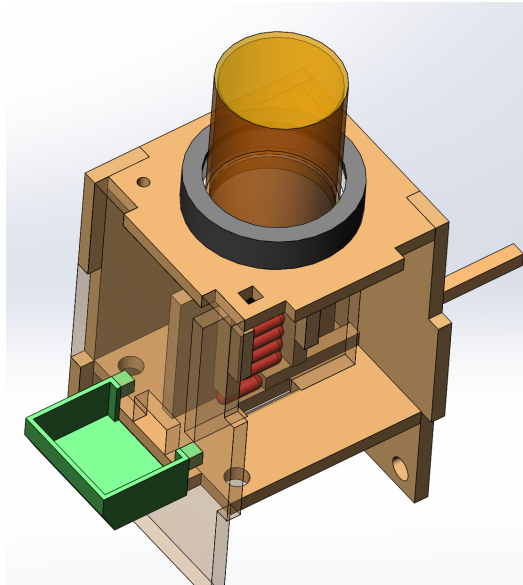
The CAD Sketching of Mechanical System With Pill Bottle and Pill Shaft
